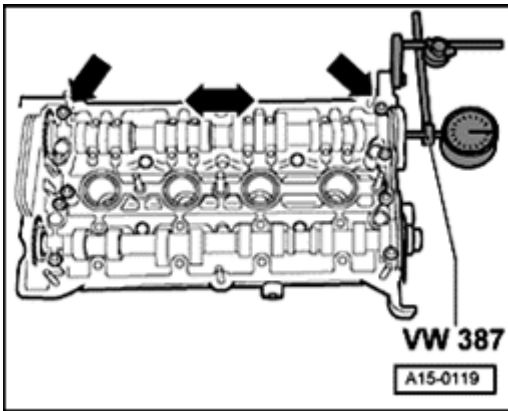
Securing Dial Gauge Holder VW 387 To Dial Gauge On Cylinder Head
